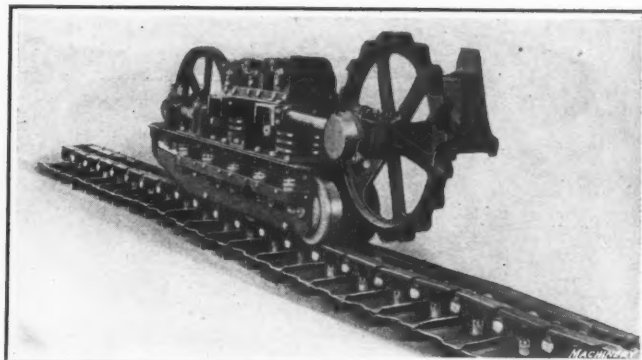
Track Assembly with Track opened out, 75-horsepower Tractor
